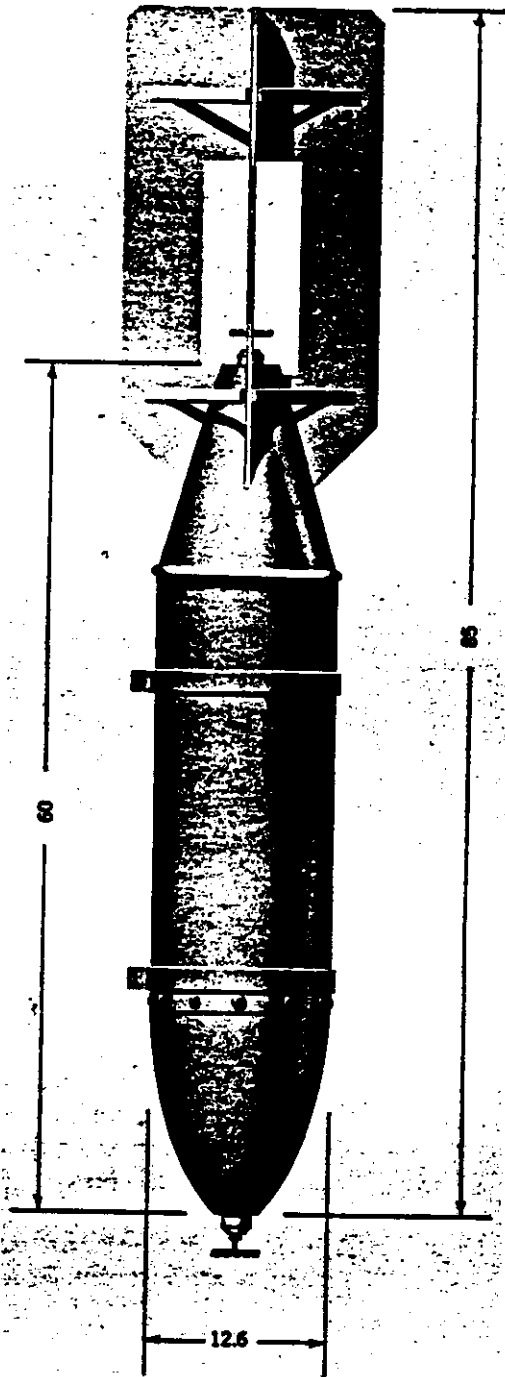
FAB-250 (WELDED) GENERAL PURPOSE BOMB.
